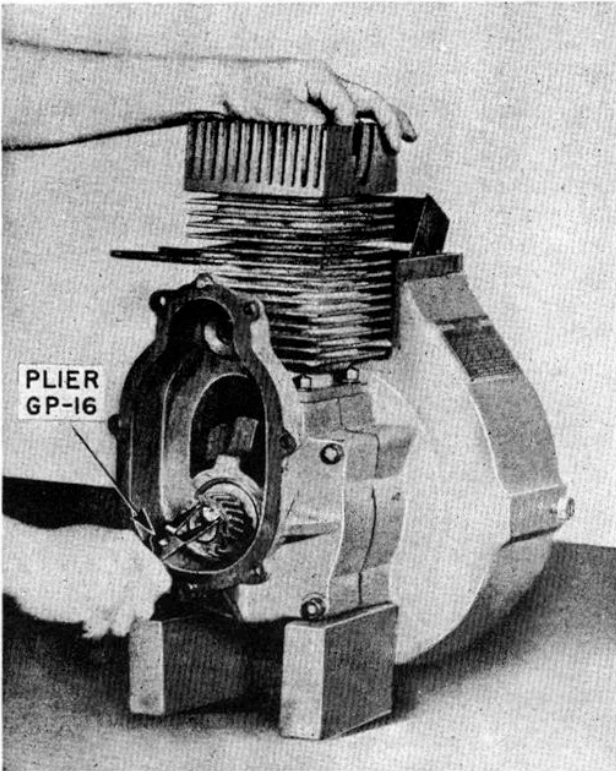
REMOVING CRANKSHAFT GEAR SNAP RINGS
